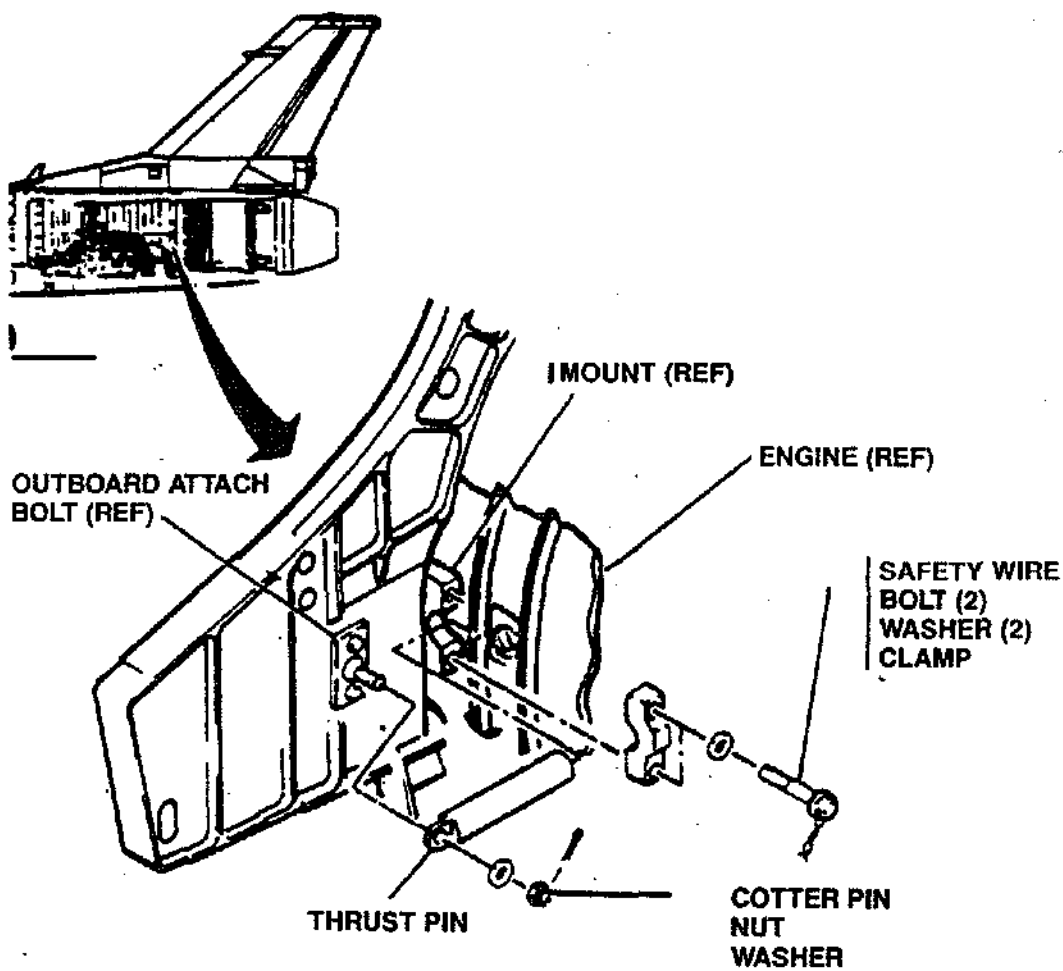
F-16/F110-GE-100 Thrust Mounts
